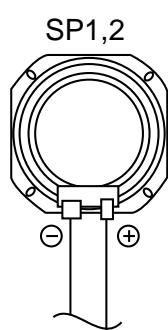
SPEAKER EXPLODED VIEW (1/2)
